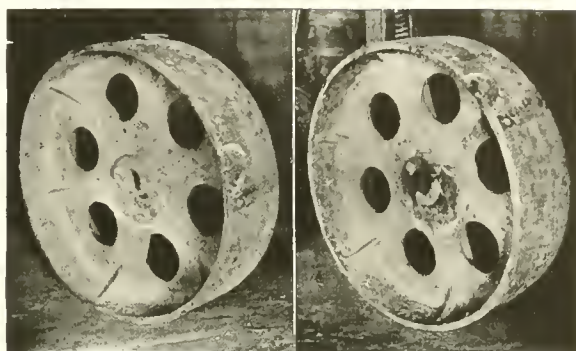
Steel Pulley Casting on which a defective boss has been repaired by building up with the arc welder. A shrinkage crack in the rim had also been repaired by arc welding.
